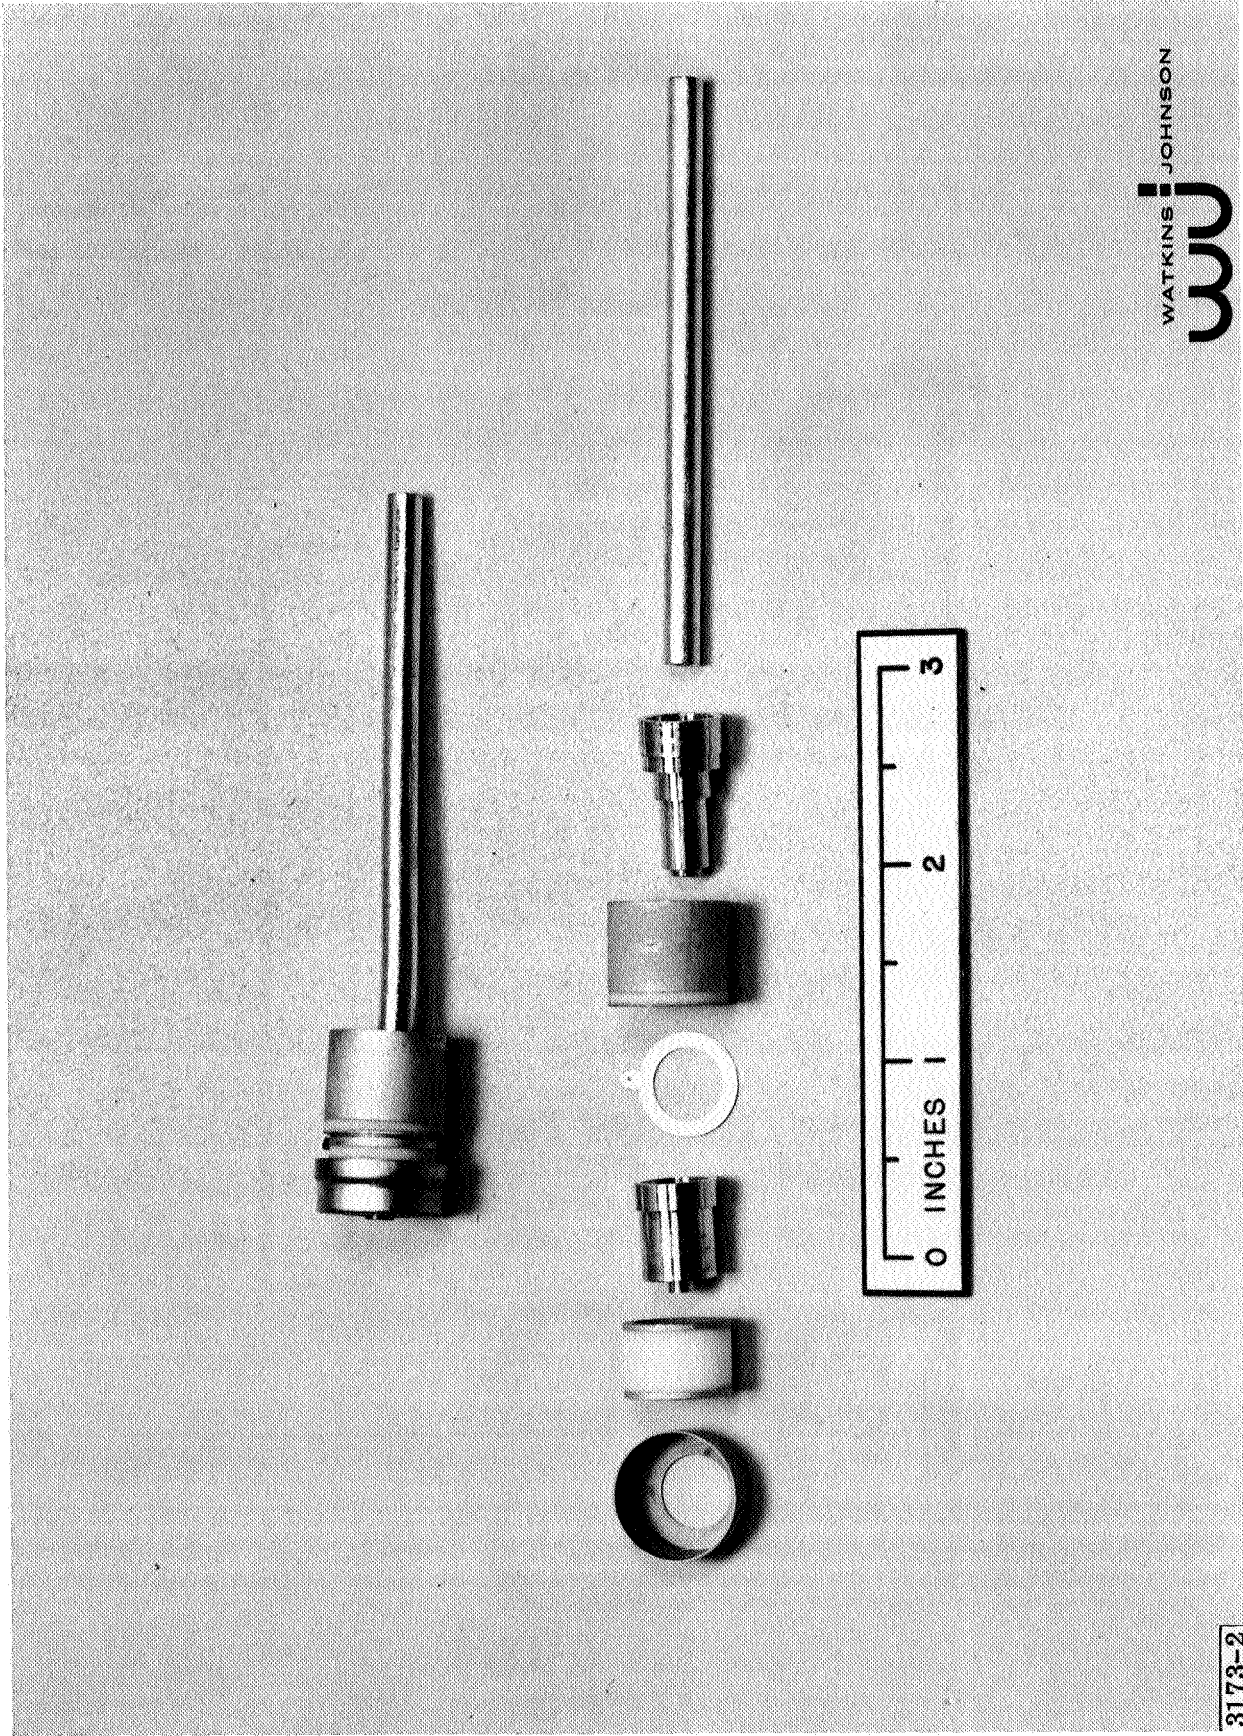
Photograph showing the WJ-274 body subassembly and its component parts including strip transmission line helix is a glazed structure using three beryllium oxide wedges for dielectric support.
